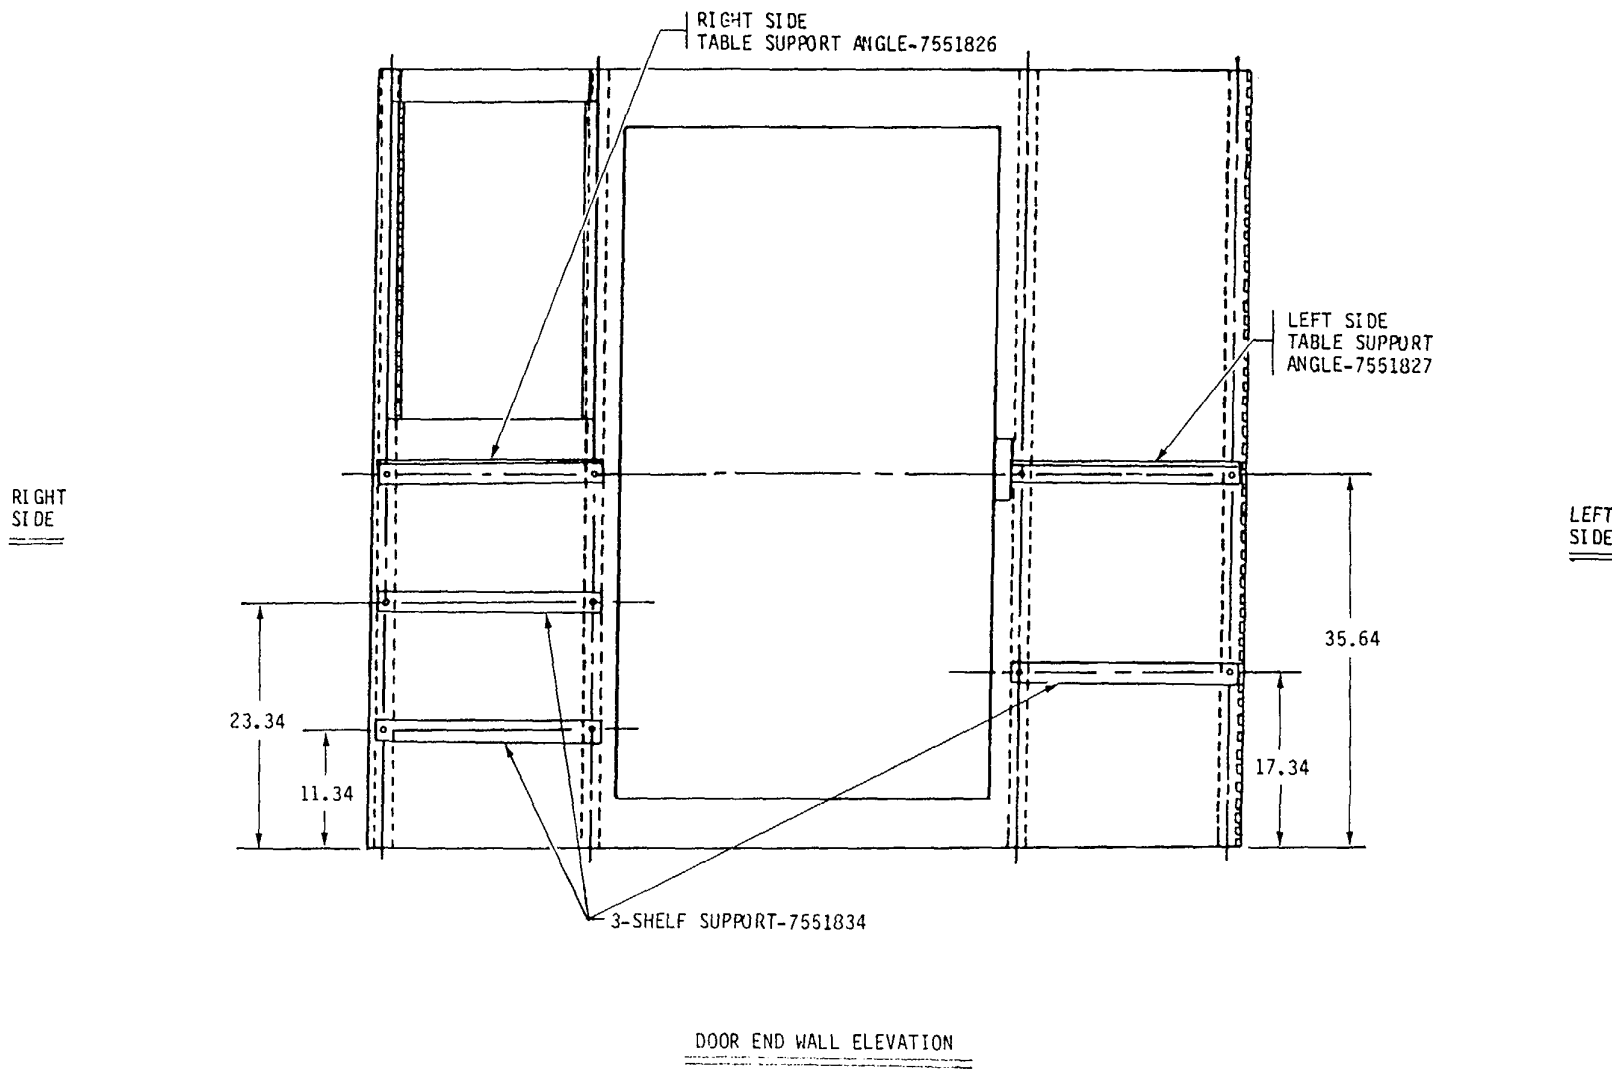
Shelf support and table support angle installation on door end wall, unit 1, 280.
